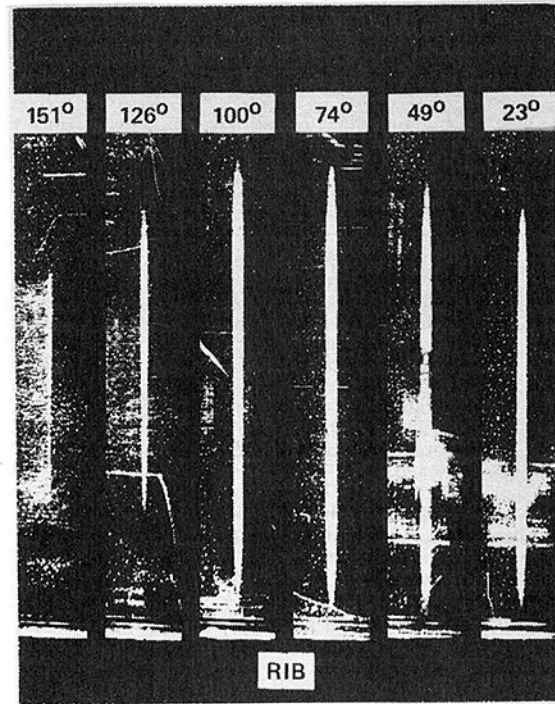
Contact pattern on bearing C in forward stall loading condition
